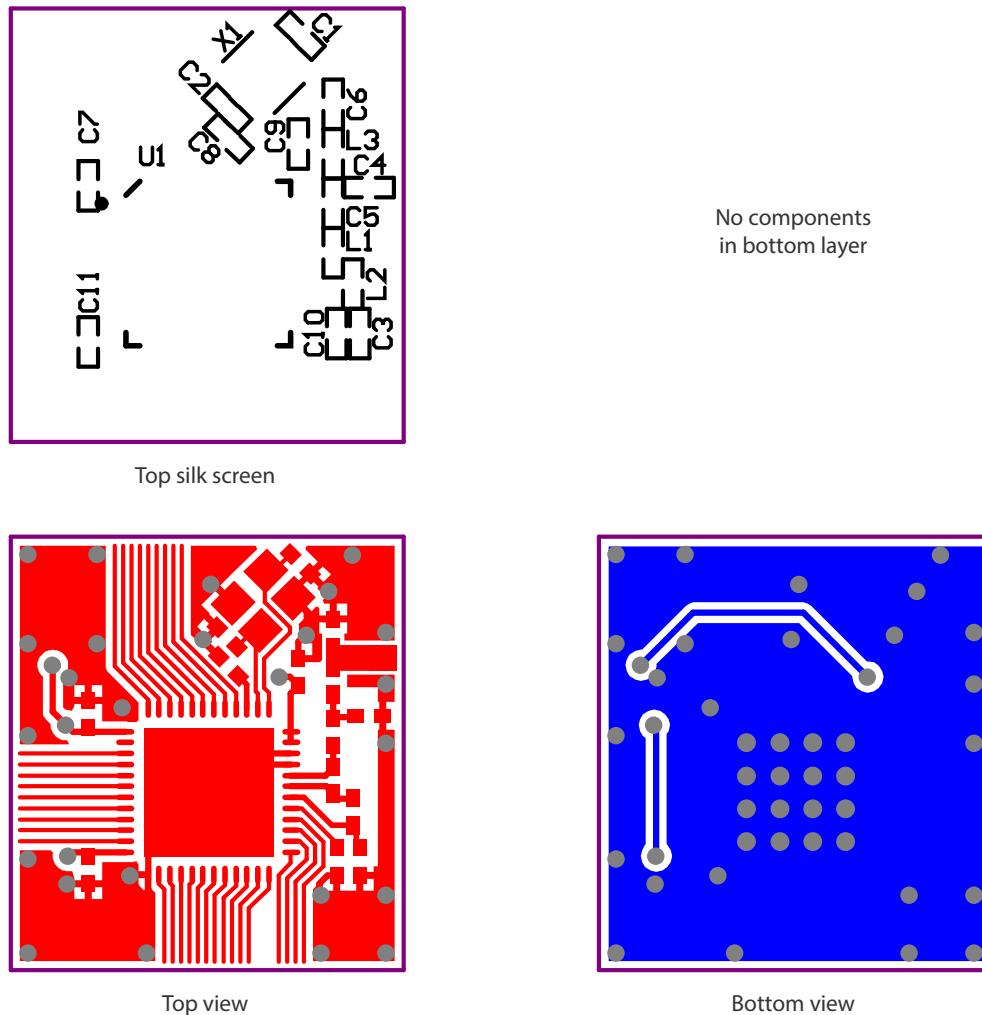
PCB layout example for QFN48 package with internal LDO setup
